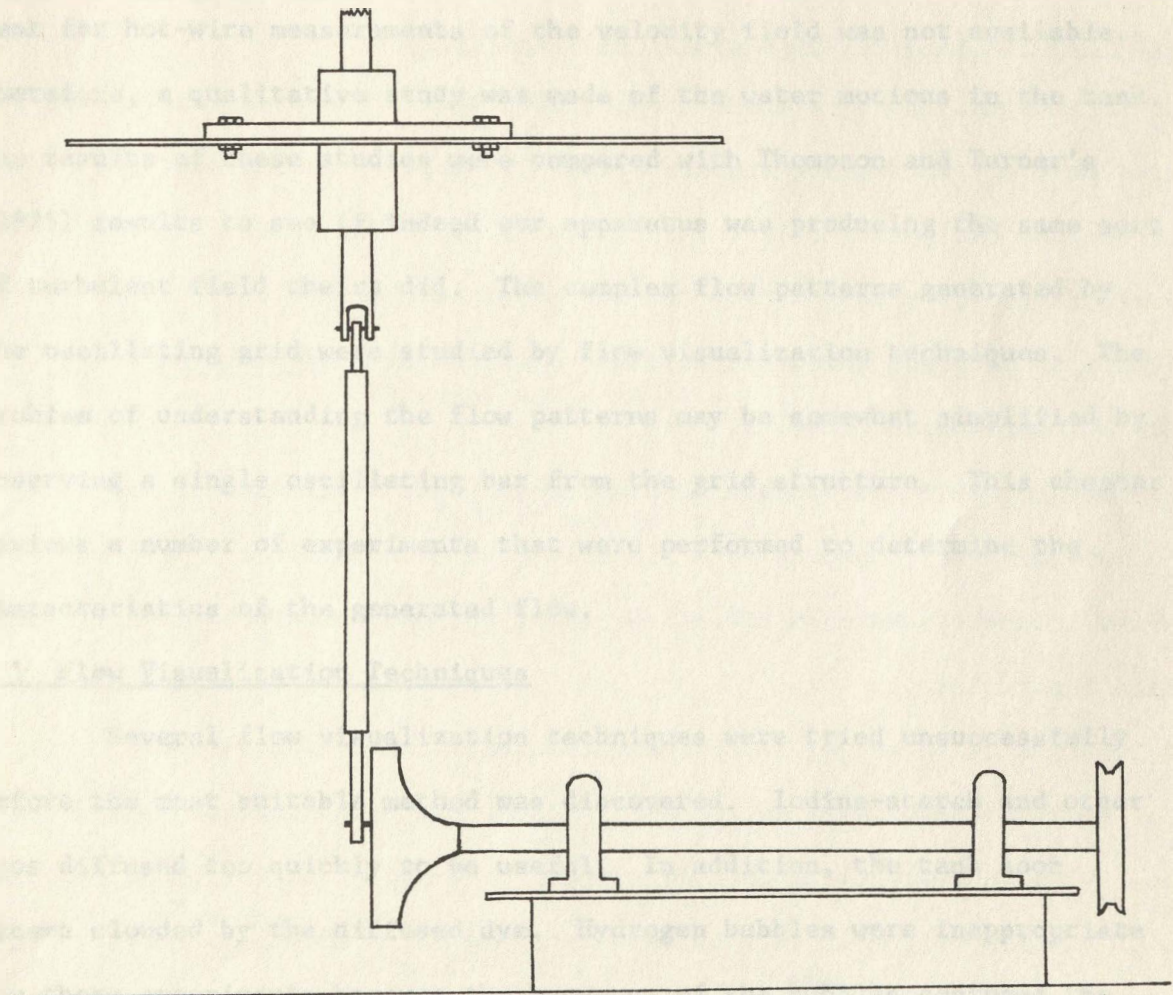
Diagram of Shaft, Connecting Arm, Eccentric Drive Wheel, and Pulley.
